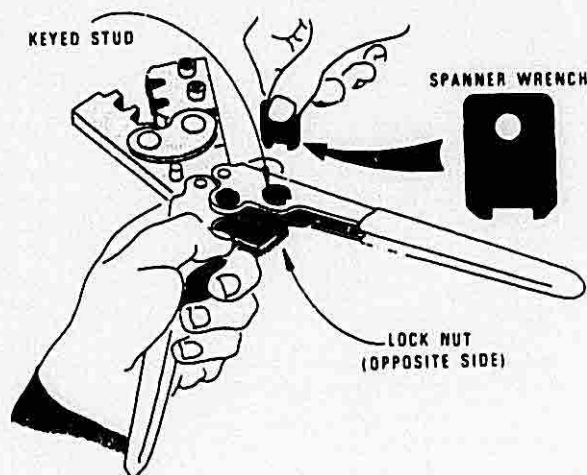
CRIMPING TOOLS AND CONNECTORS
